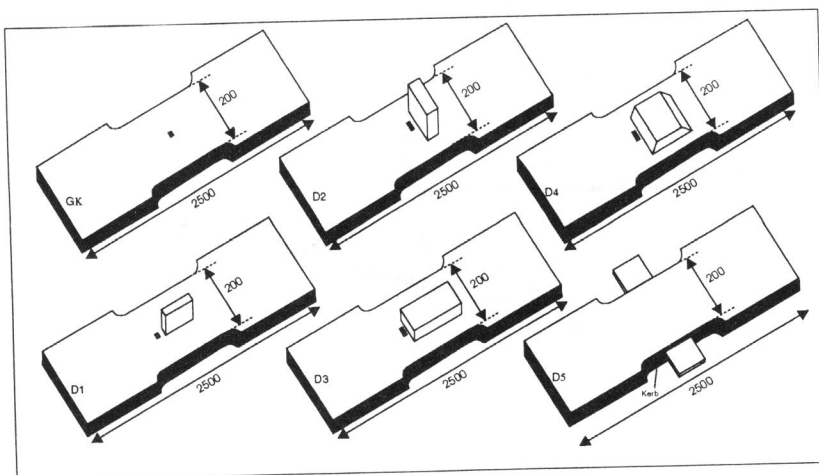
Large scale specimen with different welded attachments and surface cracks
